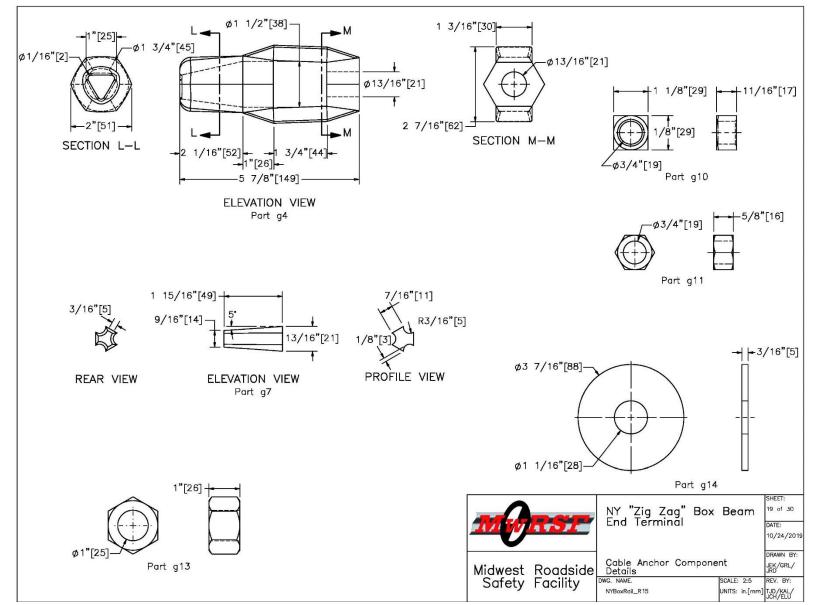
Cable Anchor Component Details, Test No. NYT-1
